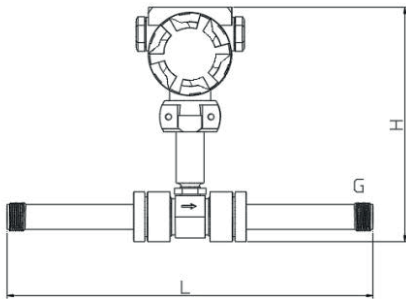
DN4-DN10mm Threaded connection type (including straight pipe section)
